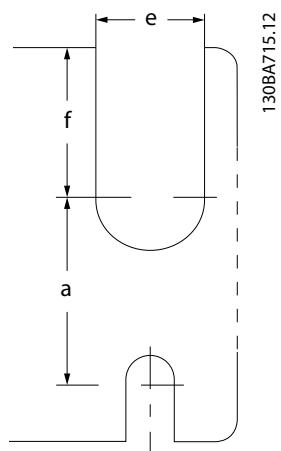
Top and Bottom Mounting Holes (B4, C3, and C4)
